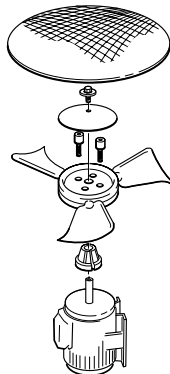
Impeller wheel COOL 250-, 300- and 450-series
